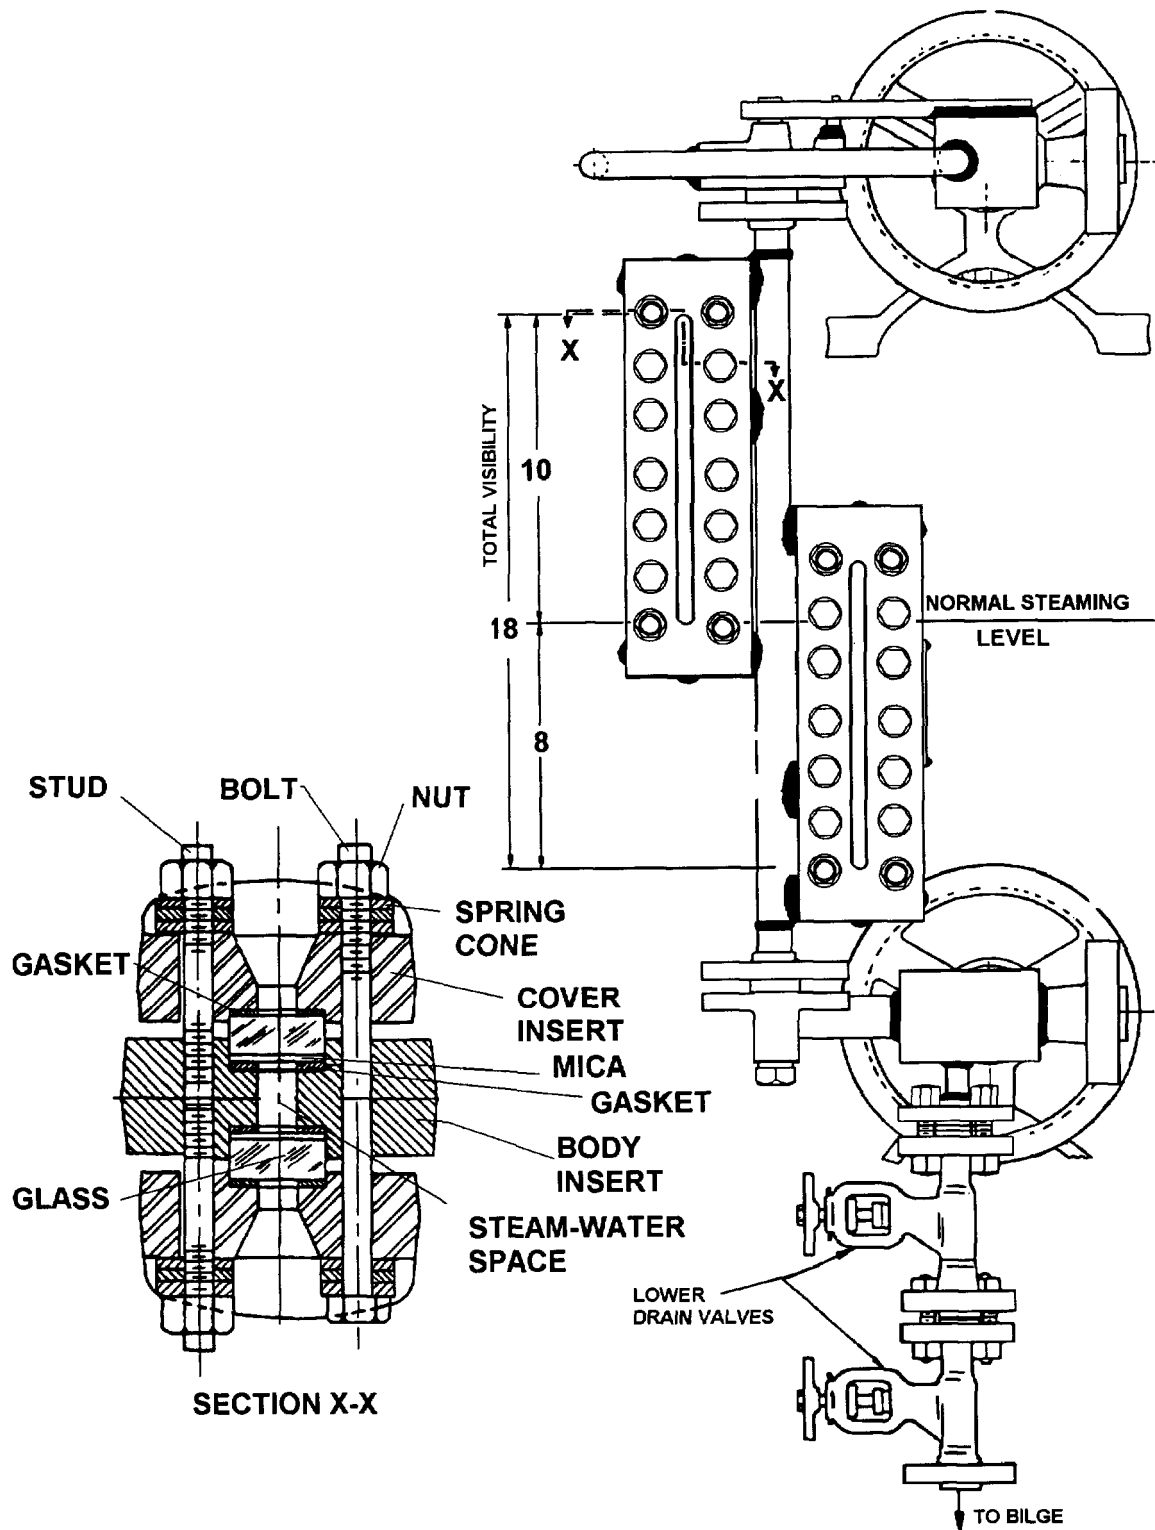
Typical Arrangement of Gauge Glass (Yarway Shown)
